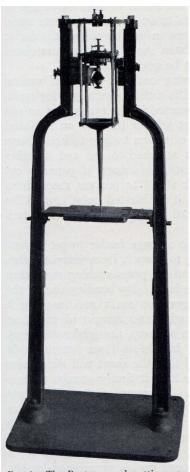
The Benton punch-cutting machine, on which the first steel punch was cut for the Mergenthaler linotype machine. The second machine built by Benton. The Mergenthaler Printing Company bought No. 3 in 1889 and several others shortly after. Without this invention Mergenthaler's invention was impracticable. This machine is in the Typographic Library and Museum of the American Type Founders Company, in Jersey City.
